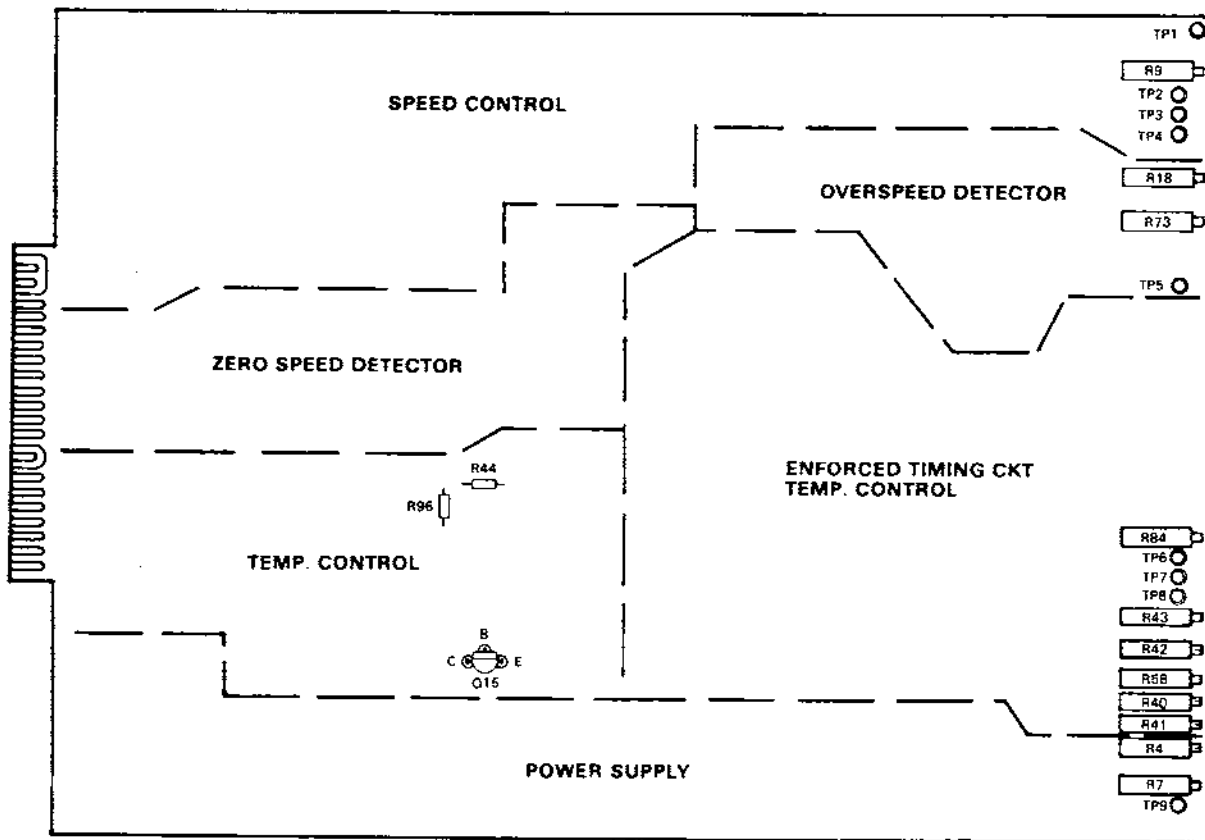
Test Point and Adjustment Locations for P.C. Board Assembly, PN 50059
